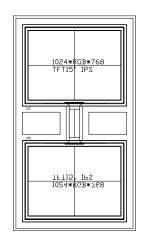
TFT-LCD Module Outline Dimension (Front View)
